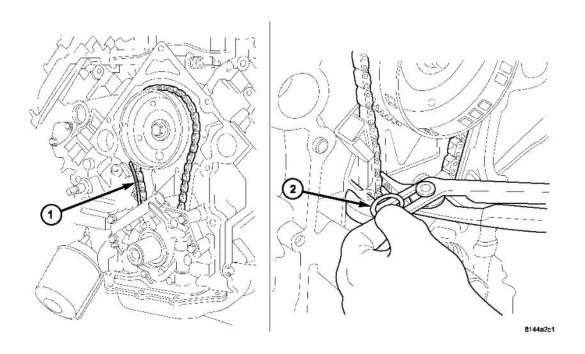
Retracting Tensioner Courtesy of CHRYSLER LLC
